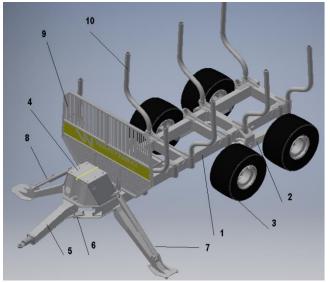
Solid model of a forest trailer: 1 - frame, 2 - axle beam, 3 - road wheel, 4 - hydraulic oil tank, 5 - drawbar, 6 - drawbar power, 7 - paw, 8 - paw actuator, 9 - partition, 10 - stanchion
